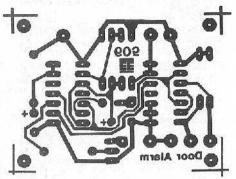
Component layout and full size printed board copper foil master pattern for the Door Sentinel.
